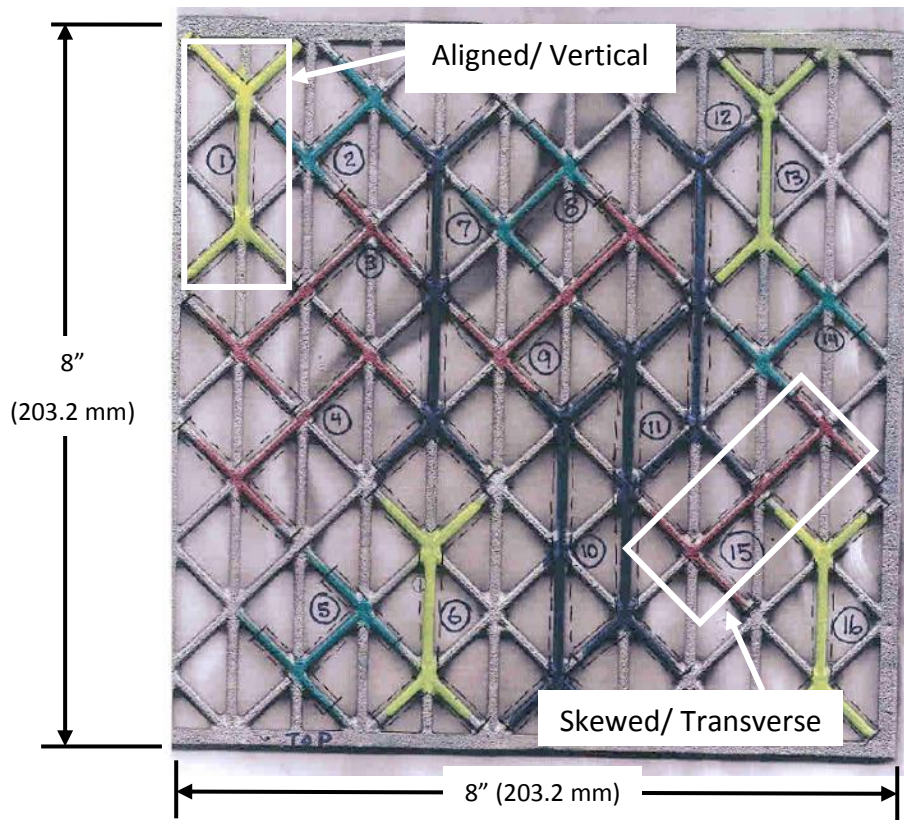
Typical Marked Panel for Cutting of Facesheet Specimens
